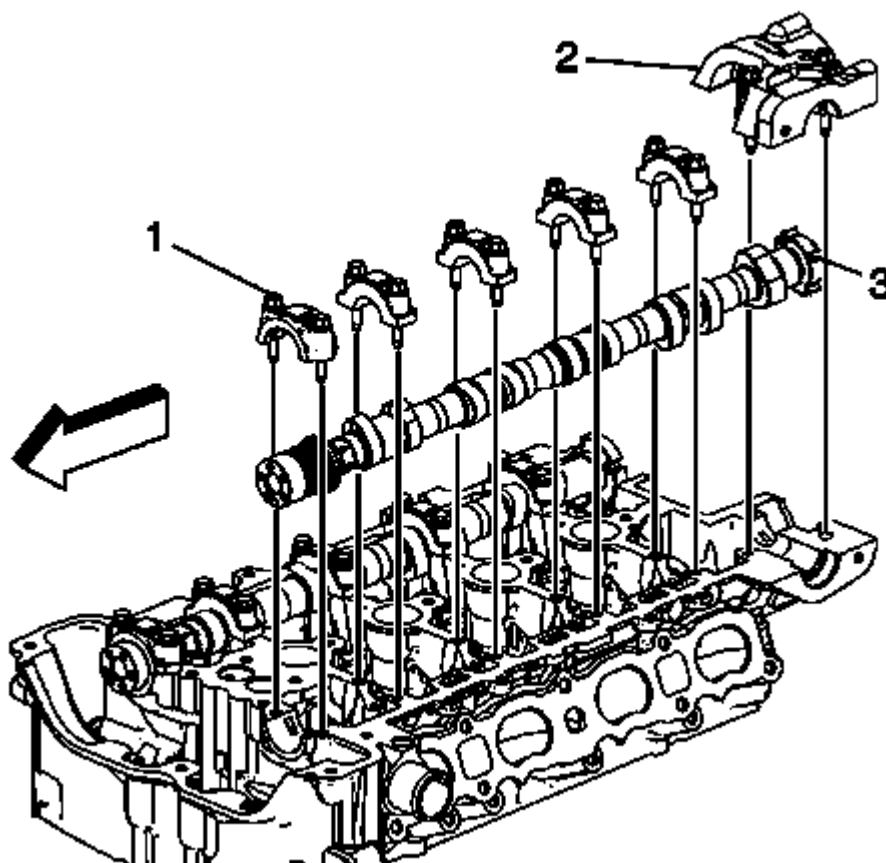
Intake Camshaft Bearing Rear Cap Bolts And Cap
